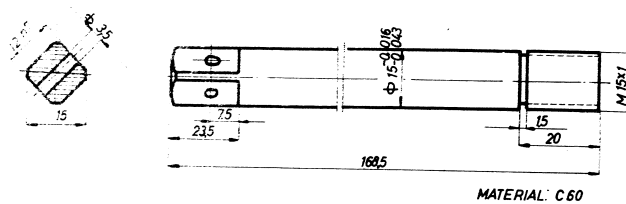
SPINDLE, BARREL TRAVERSING MECHANISM
